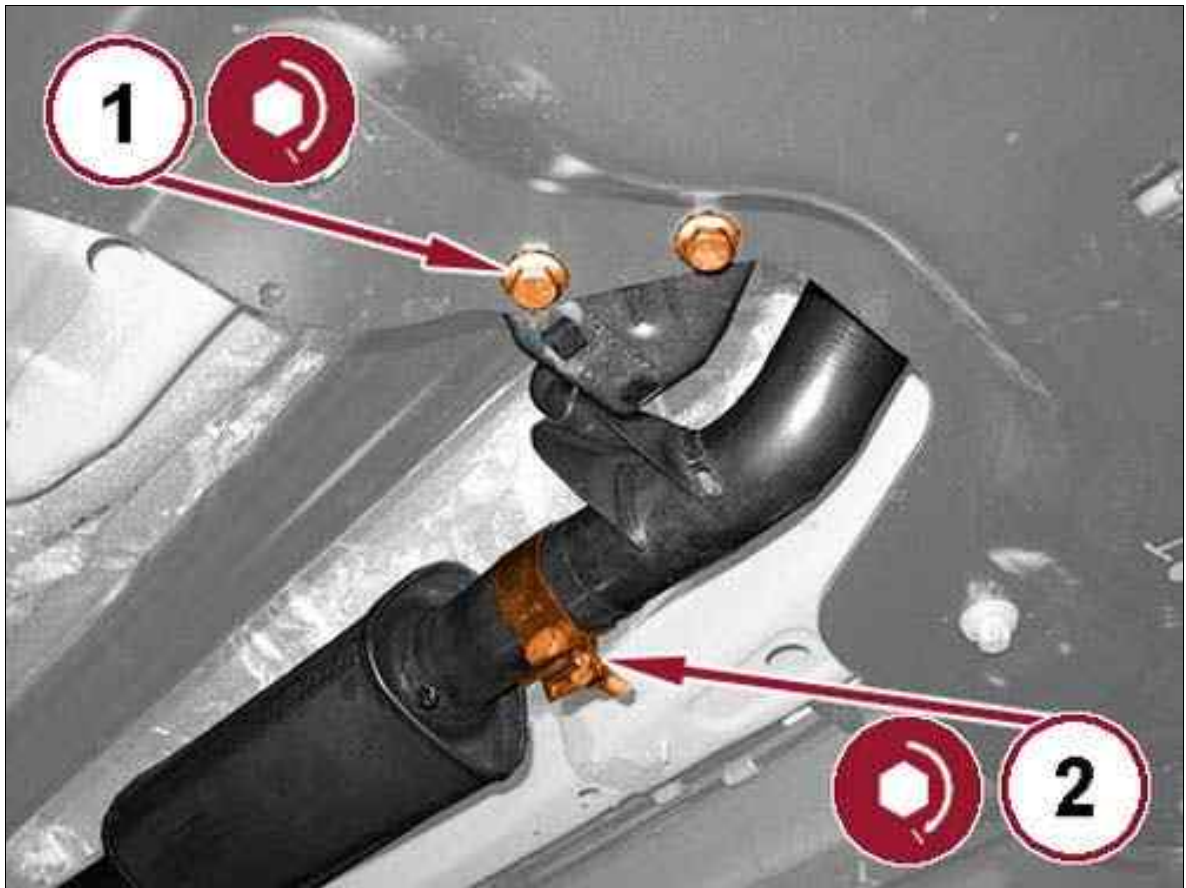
Front Exhaust Pipe Support Bracket Bolts & Exhaust Pipe Support Bracket Bolt
